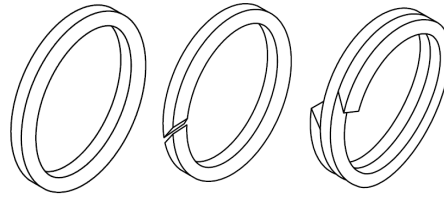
Continuous uncut, single-turn (scarf-cut), and spiral-cut backup rings (from left to right)
